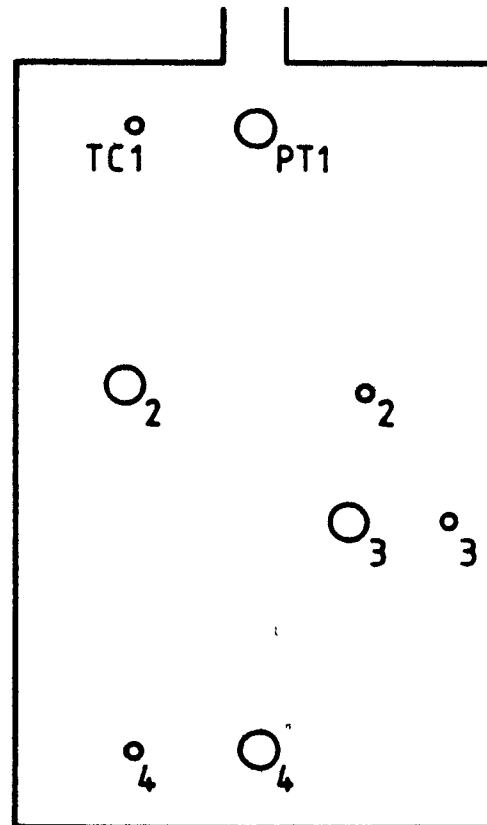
The Instrumented Mold Cavity, PT = Pressure Transducer, TC = Thermocouple.
